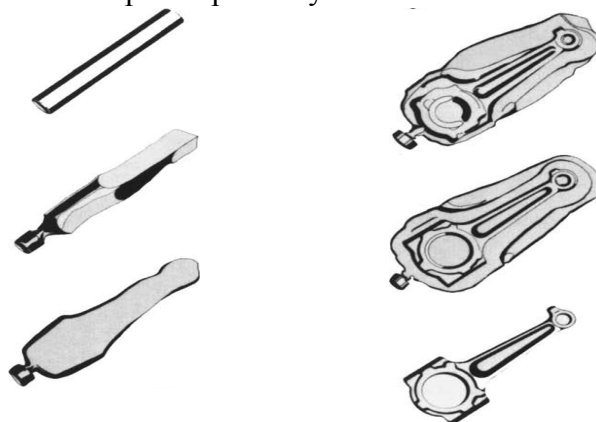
Steps involved in the closed-die forging of automotive connecting rods.
